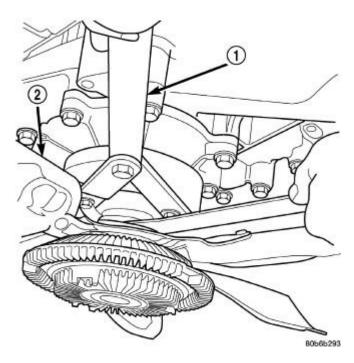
Using Special Tool 6958 Spanner Wrench & Adapter Pins 8346 Courtesy of CHRYSLER LLC
